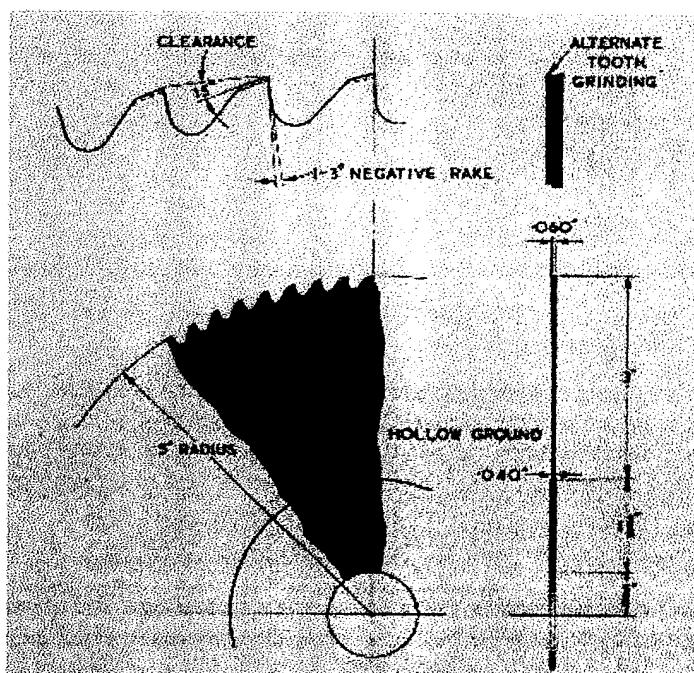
Method of grinding a 10 in. diameter hollow ground saw of high speed steel for cutting "Perspex" acrylic sheet.
